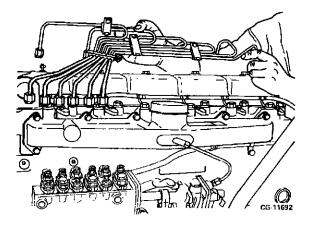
Remove Fuel Injection Lines as an Assembly
